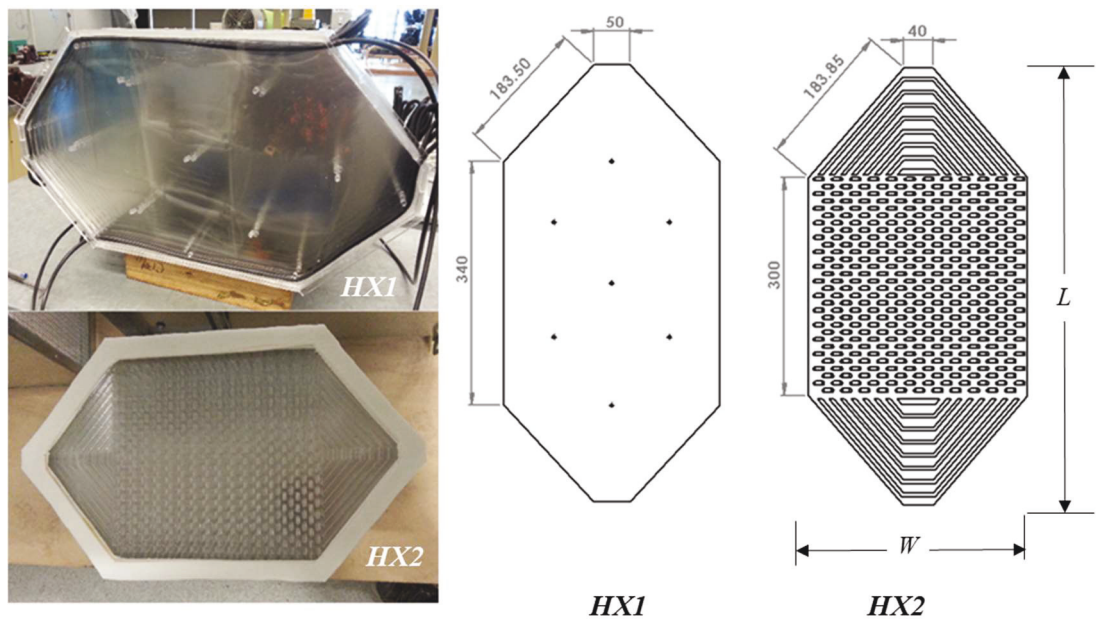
Surface Geometries and dimension of plates in two heat exchangers
